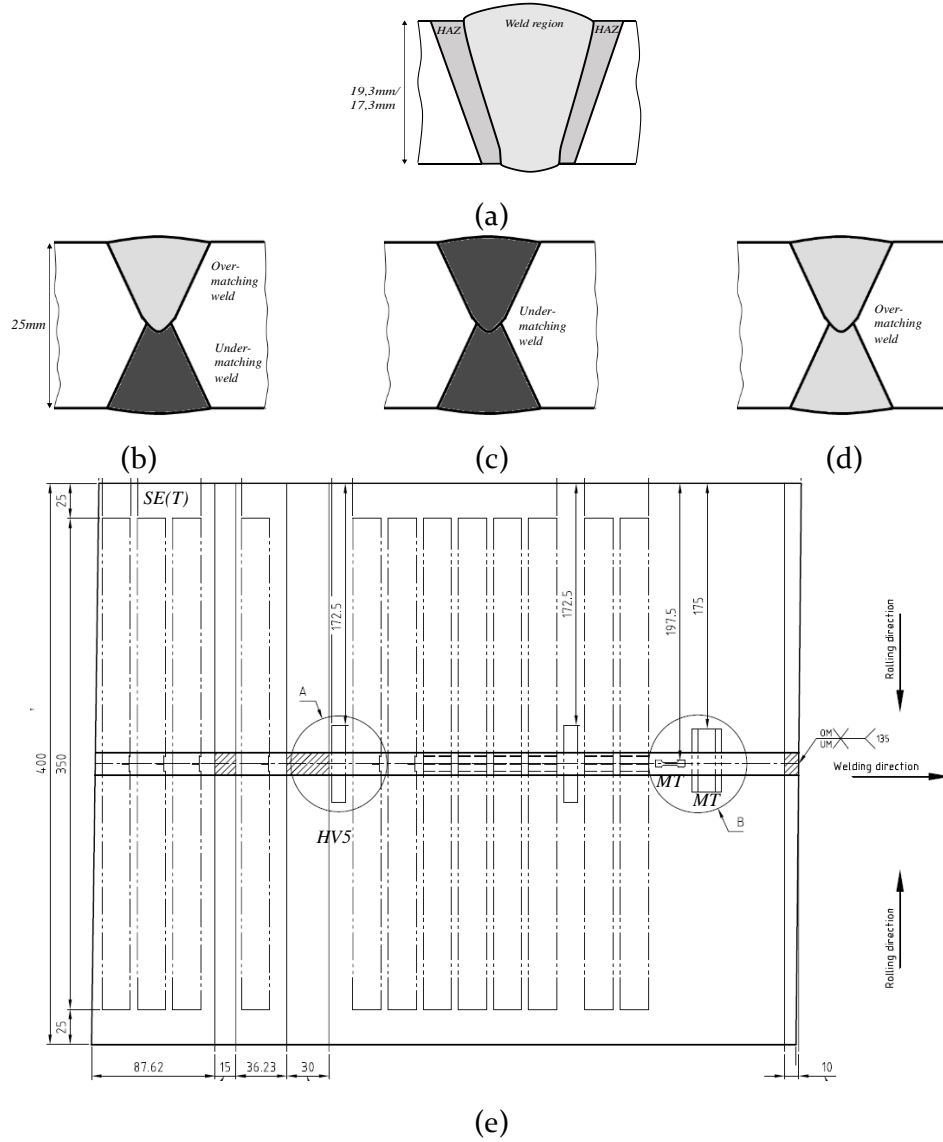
(a) Girth weld with V shaped configuration, (b) test plate having an X shaped weld configuration with OM-UM weld, (c) test plate having an X shaped weld configuration with UM weld (d) test plate having an X shaped weld configuration with OM weld (e) A sample drawing of the extraction of the SE(T), HV5 and MT samples from a welded plate
